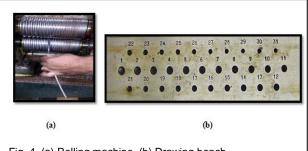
(a) Rolling machine, (b) Drawing bench.
